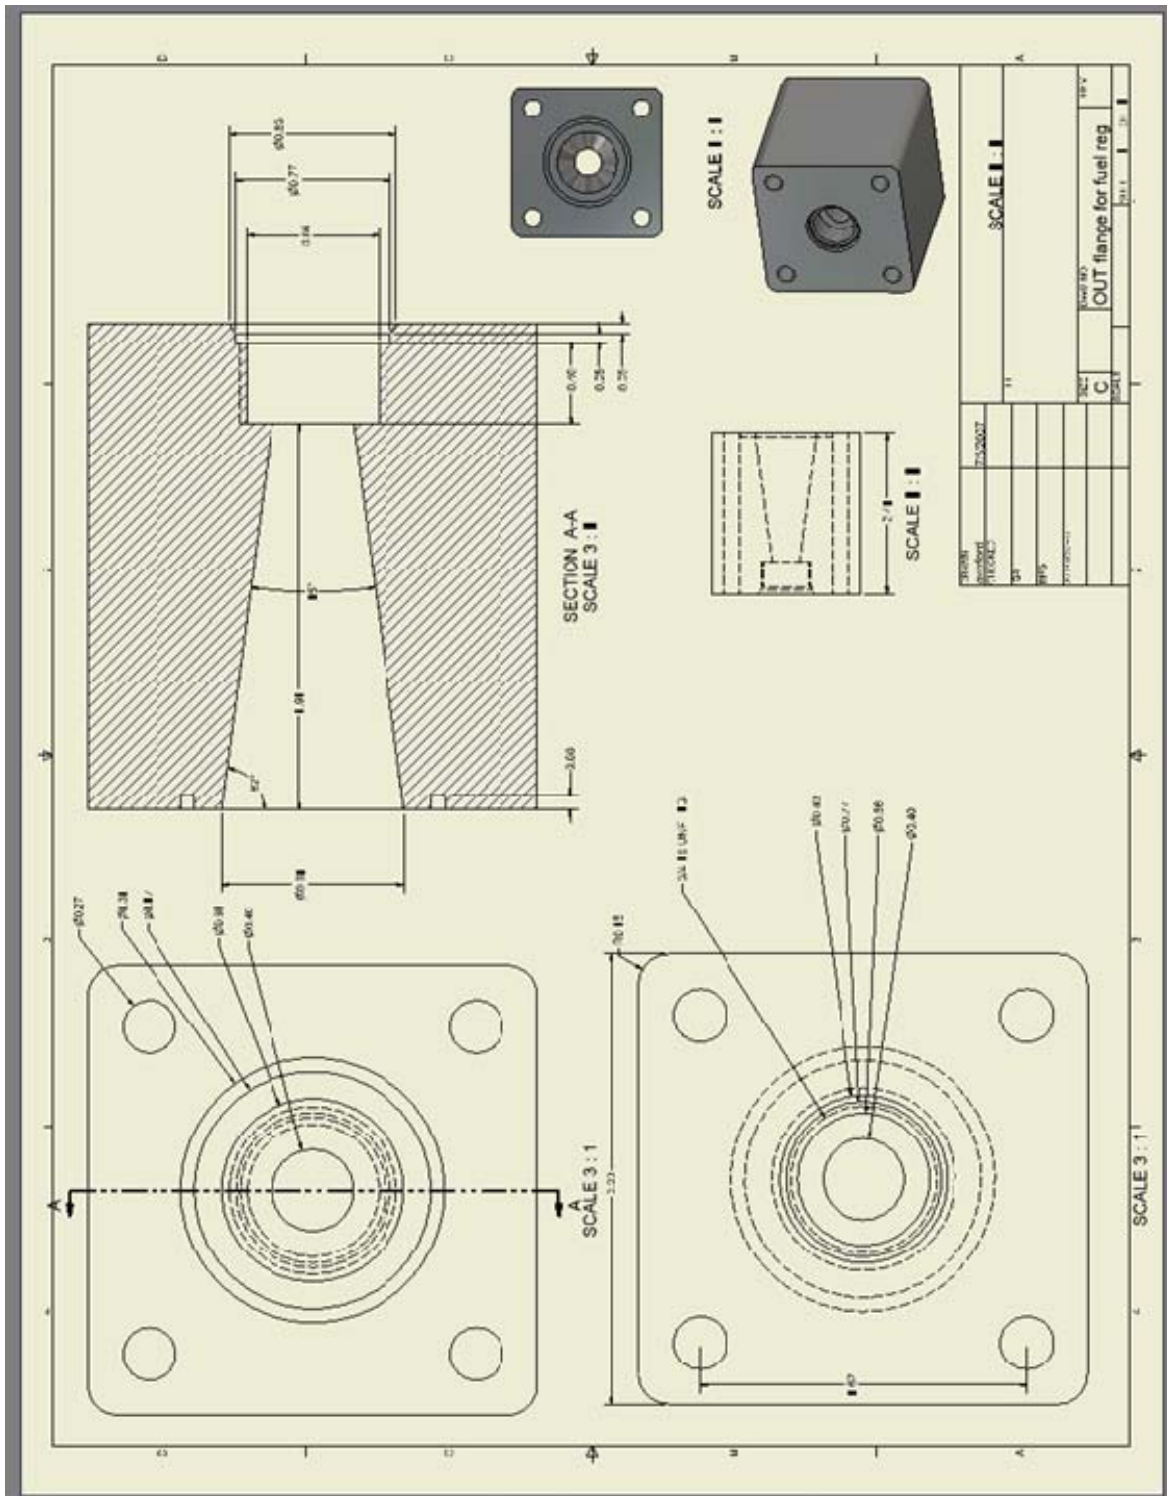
Fuel regulating valve outlet flange adapter engineering drawing
